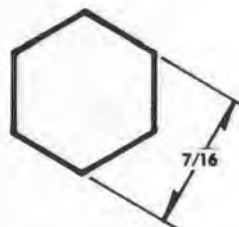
B. Work Aid, Tail rotor Driveshaft
